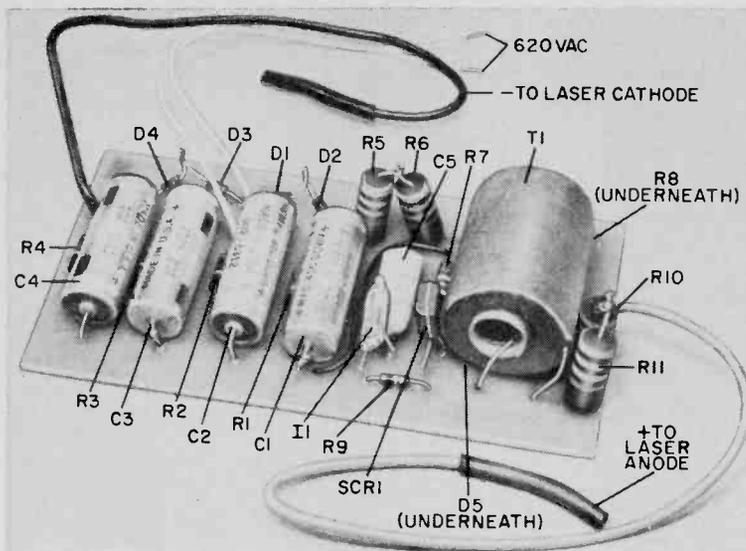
Component installation on the automatic supply PC board. Transformer T1 is an ordinary ignition coil that has plastic case removed.
